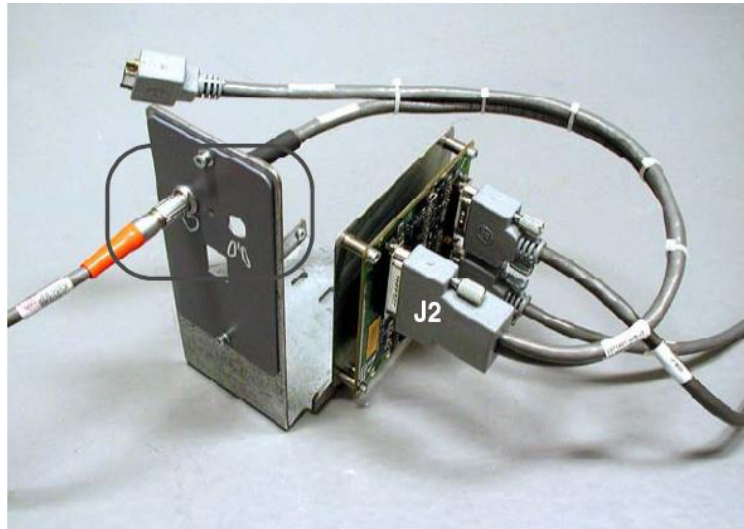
RIGHT SIDE MOUNTING BRACKET, WITH GO BOARD, BULKHEAD, AND CABLES
